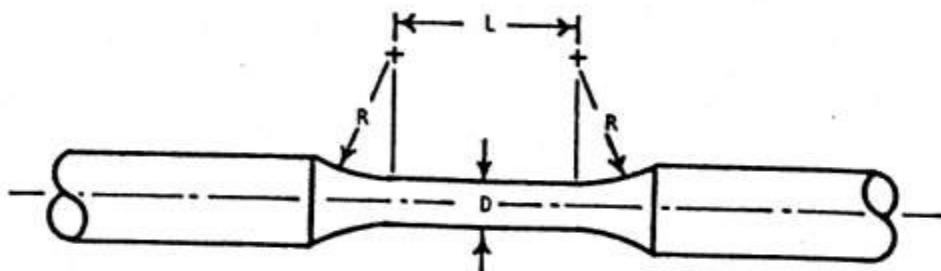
Specimens with Tangentially Blending Fillets Between the Test Section and the Ends
